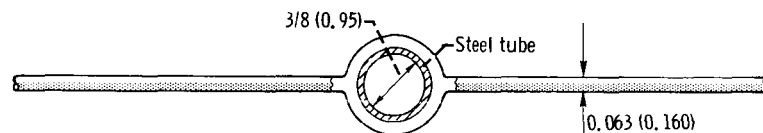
Schematic drawings of sample finned-tube assemblies. (All dimensions, are in inches (cm).)
